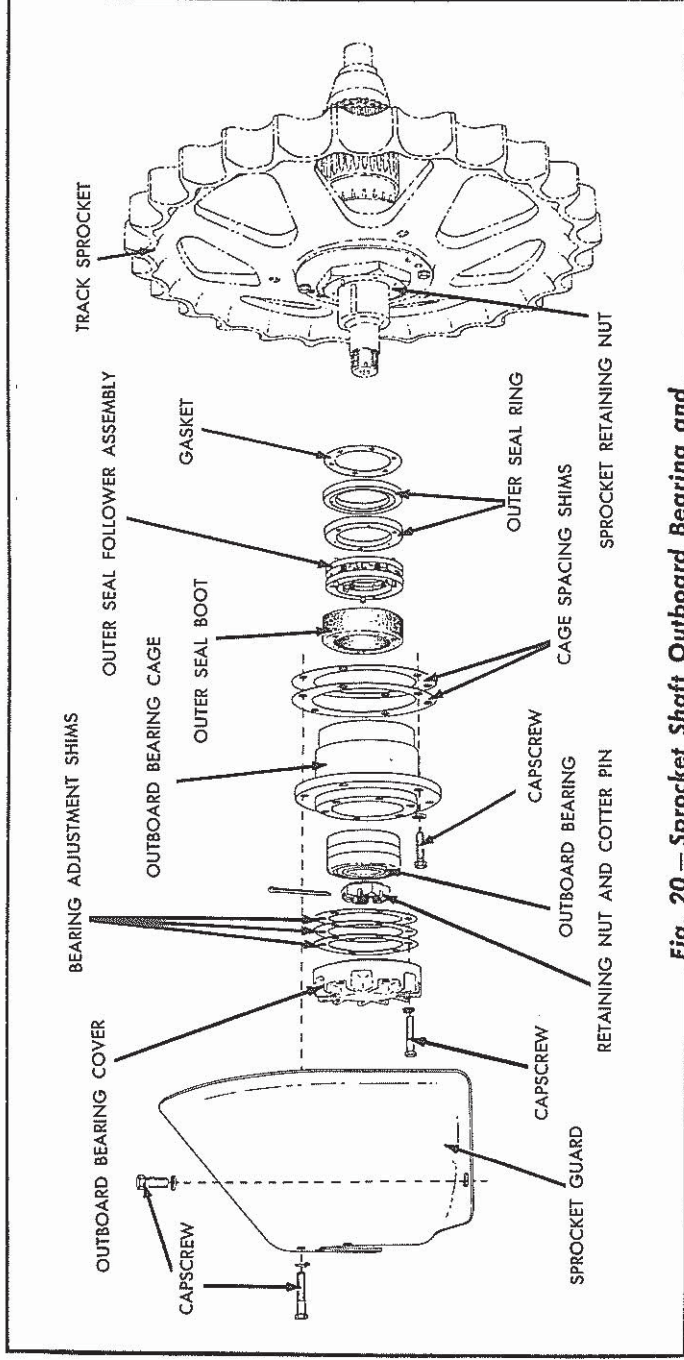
Sprocket Shaft Outboard Bearing and Outer Seal Details
